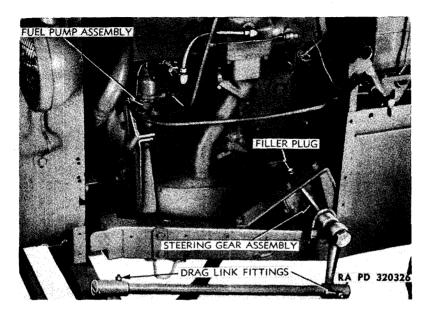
Lubrication Points on Drag Link and Steering Gear Housing
